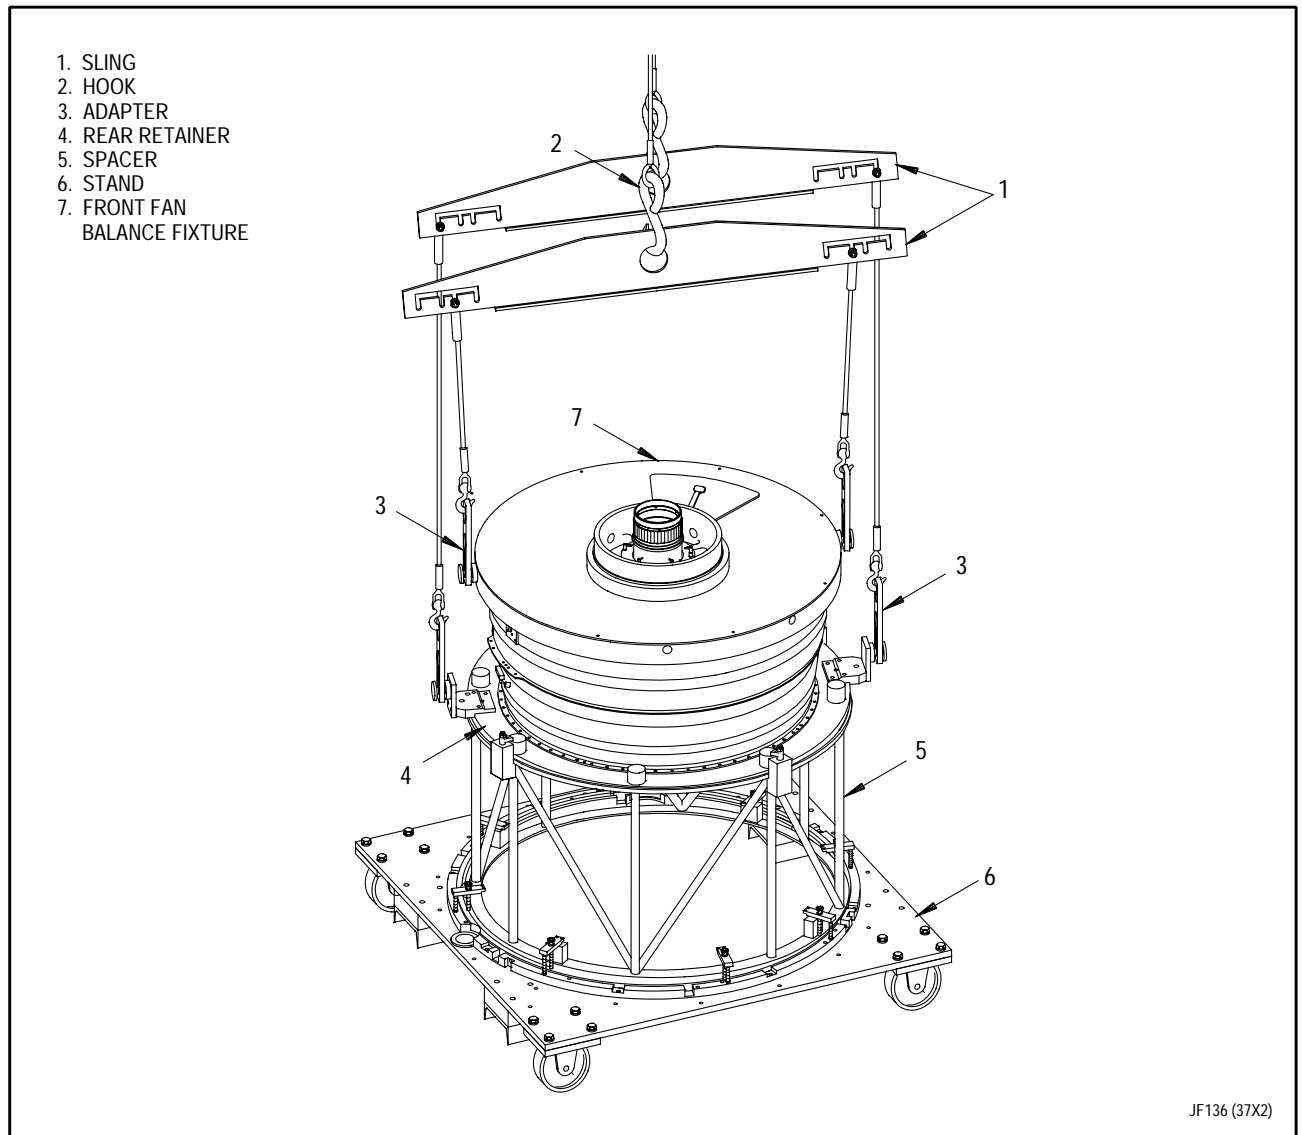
Front Compressor Rotor and Stator Assembly - Installation of Dynamic Balancing Tools
